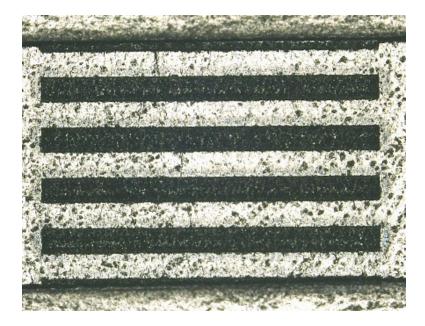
Microchannels machined on the mold using laser (before cleaning)
